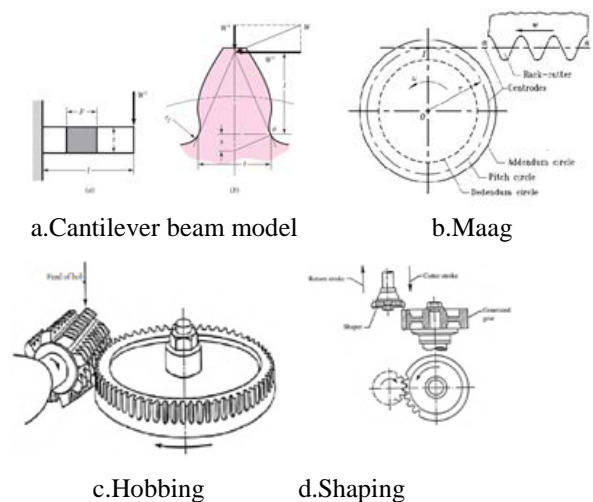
Cantilever beam model of a gear tooth under load (a) and gear generating methods (b, c, and d)
